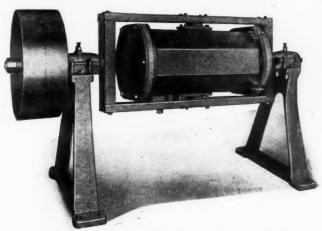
Abbott Burnishing Barrel clamped Straight in Yoke
